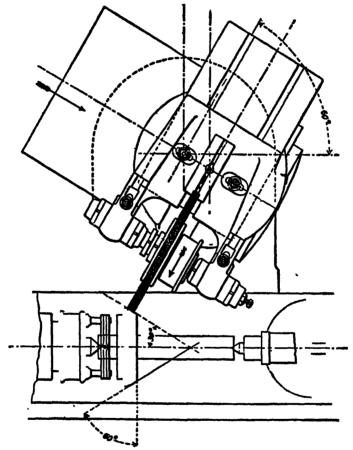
GRINDING AN ABRUPT TAPER BY SETTING OVER THE WHEEL STAND
